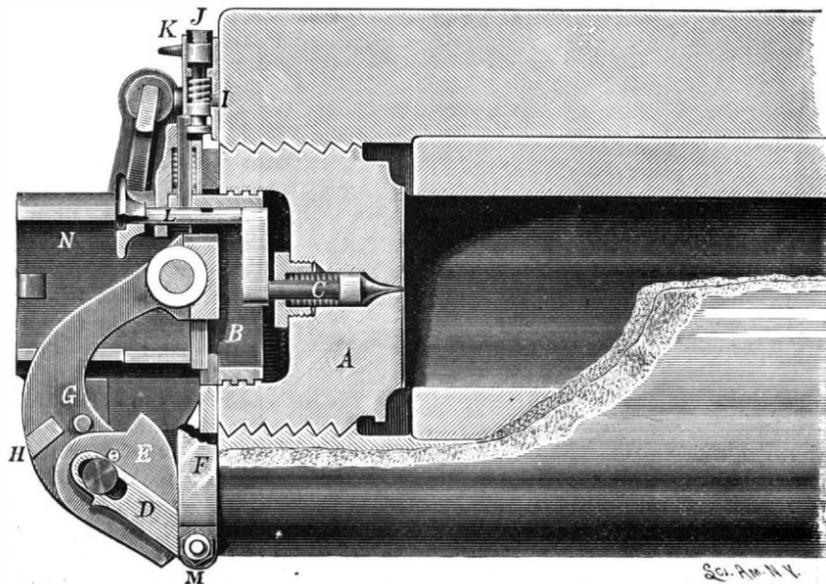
HORIZONTAL SECTION OF MODIFIED MECHANISM ON AXIS OF GUN.
